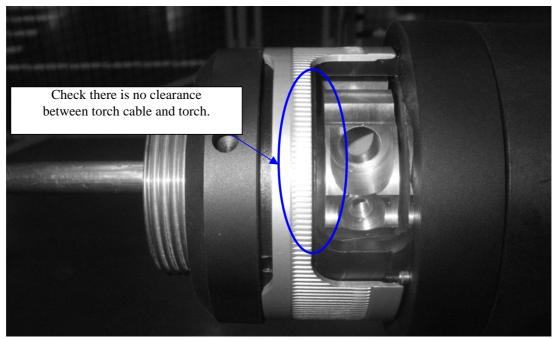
(i) Confirming of no clearance of torch cable
